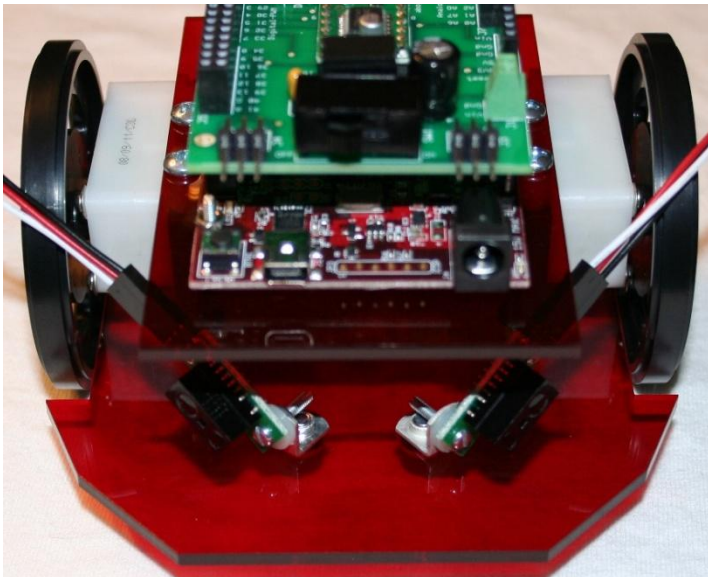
Mount GP2Y0D810Z0F Sensors to Base Plate.
